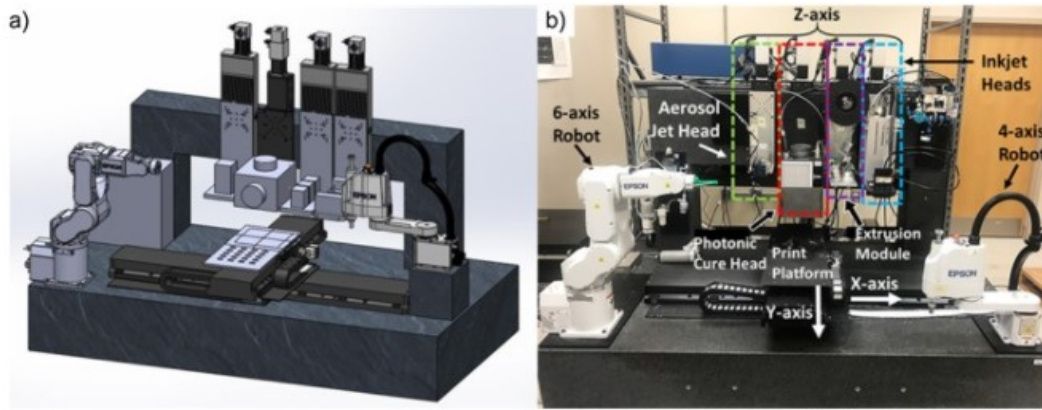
CAD schematic of the m4 hybrid 3D printer. b) A photograph of the assembled printer with each print head, robot, and motion axis labeled [52].
